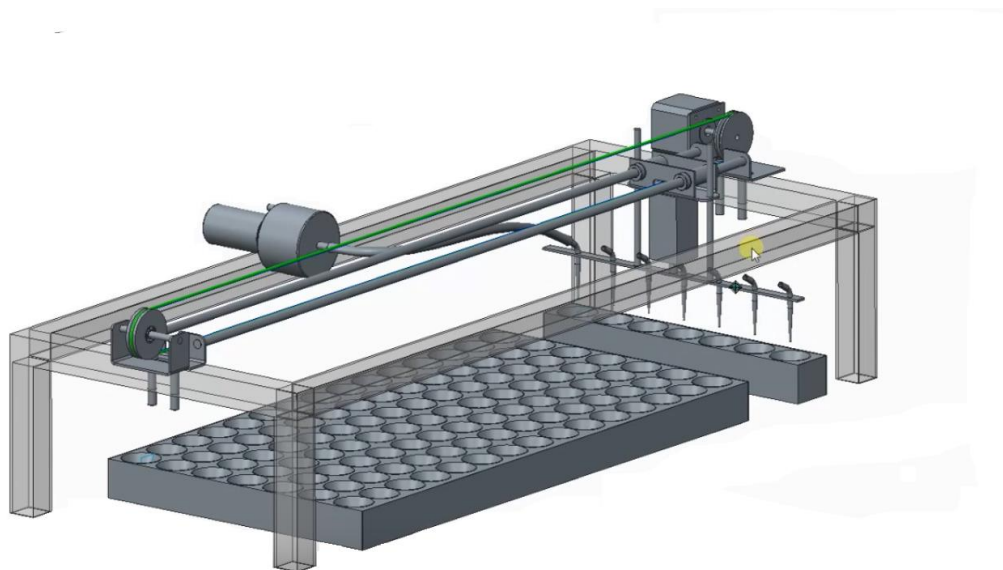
Assembly of Vacuum Seed Sowing Machine
